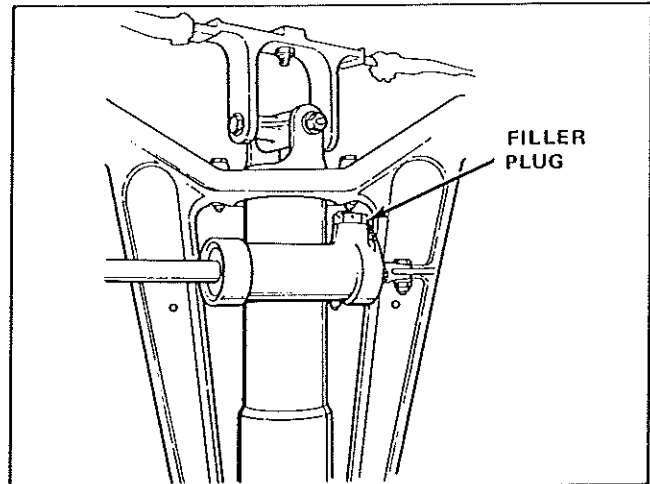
Shimmy Damper—Piston in Rear of Cylinder
